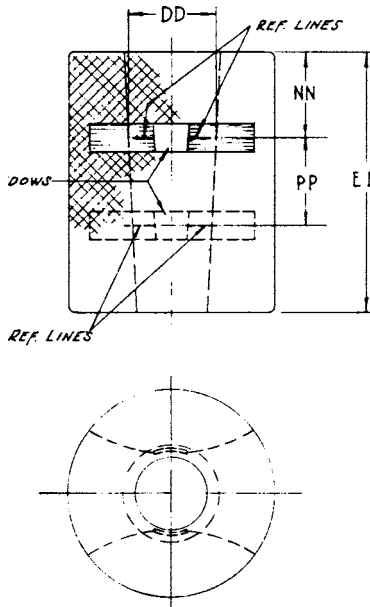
Master Ring Gage for Single Oblique-Bore Stopcocks
